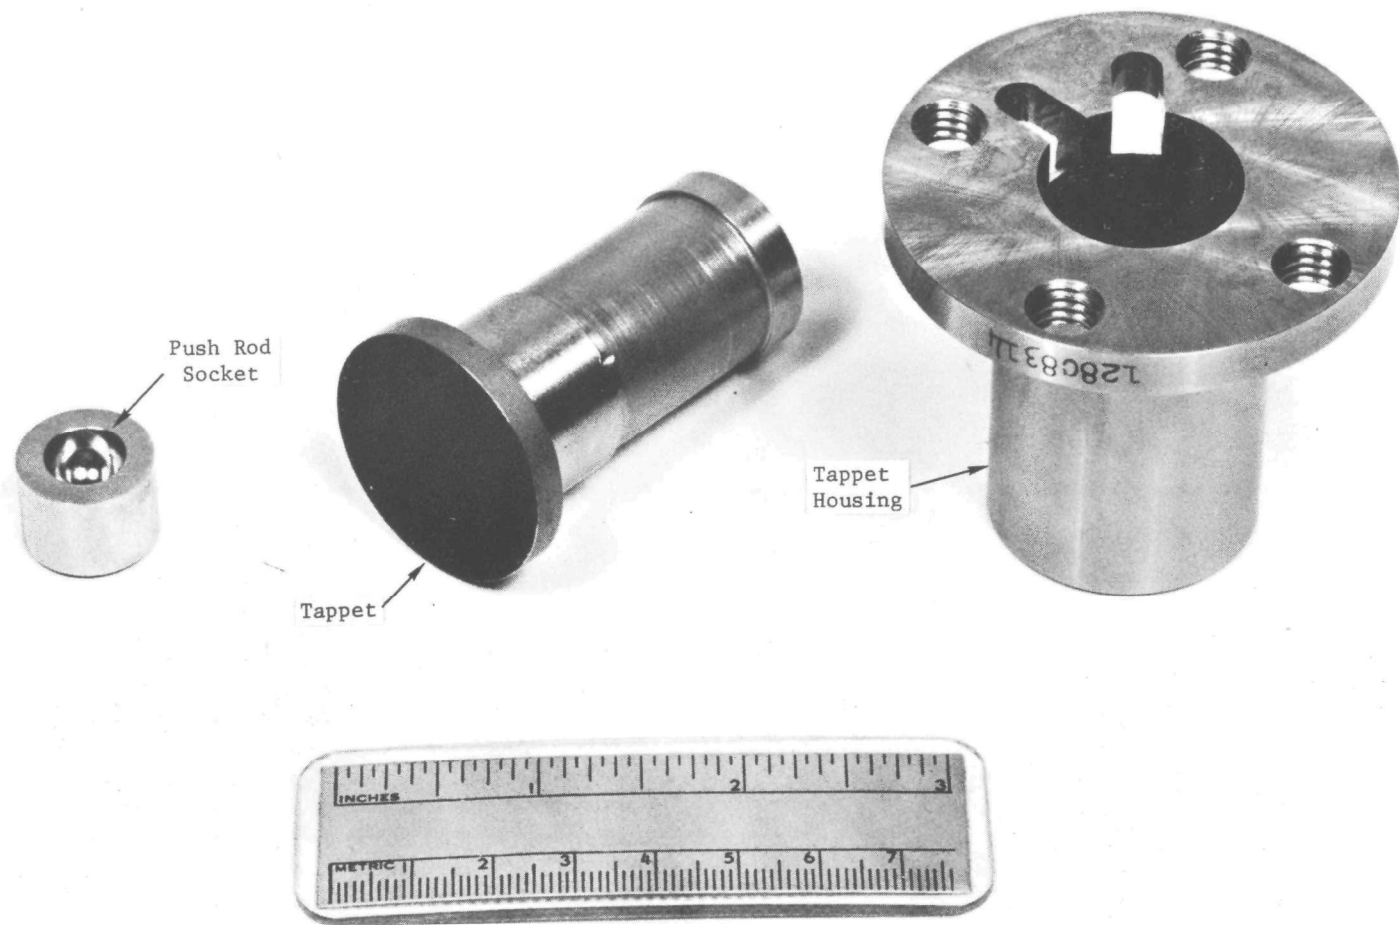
Cam Tappet Assembly (P72-3-4D).
